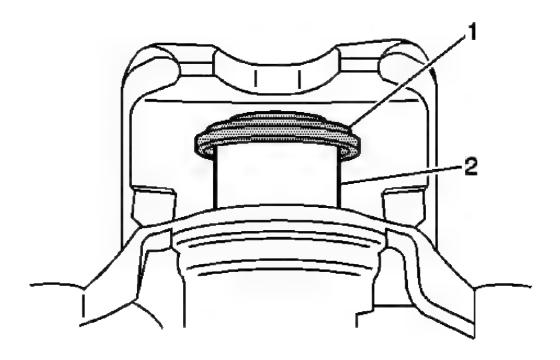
Identifying Caliper Piston & Piston Dust Boot Seal Courtesy of GENERAL MOTORS CORP.
